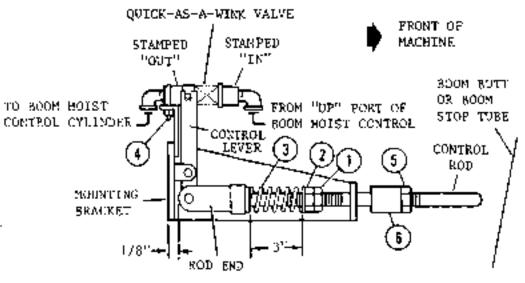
AUTO BOOM STOP ASSEMBLY
